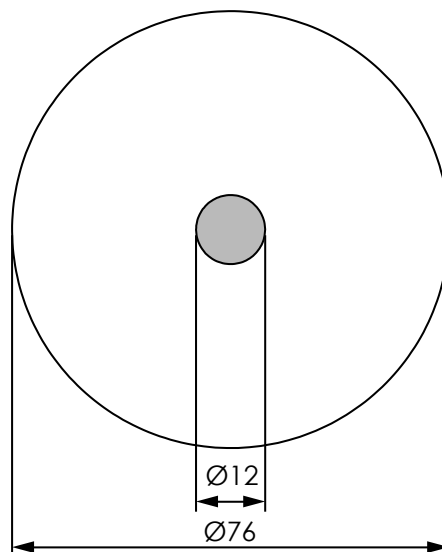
Drawing of test specimen, with dimensions in millimetres.
